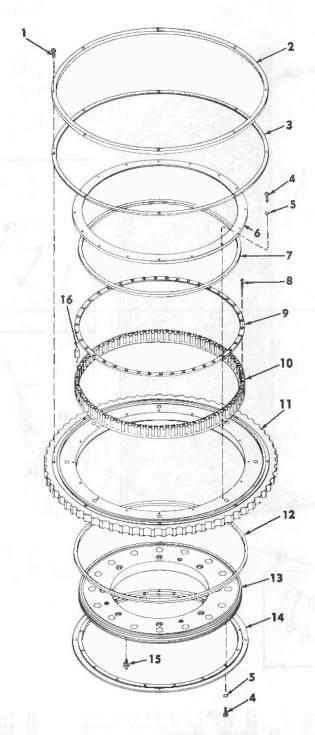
GEARCASE-MOTOR /B171679/-PARTIAL EXPLODED VIEW /SEE FIGURE 226 FOR NEXT HIGHER ASSEMBLY/
